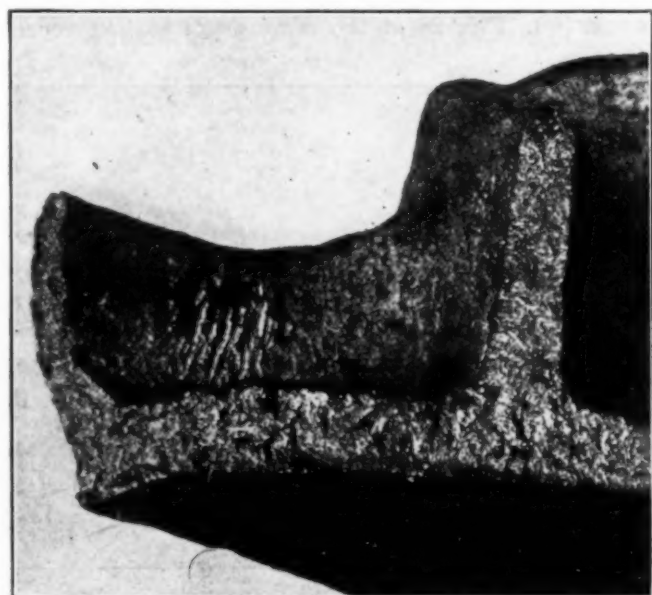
FRACTURE OF UNTREATED NICKEL STEEL CASTING
